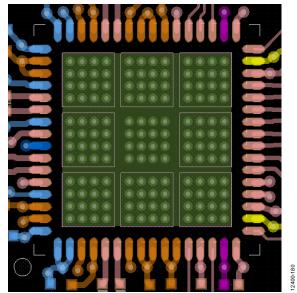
Recommended PCB Layout of Exposed Pad for the AD6674
